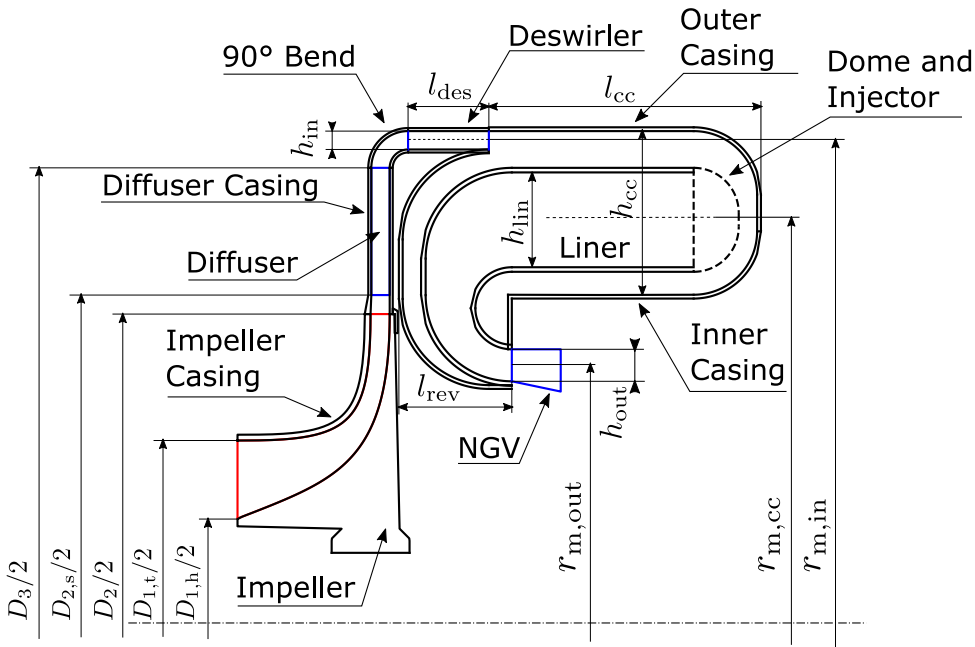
Sketch of a radial compressor connected to a reverse flow combustor indicating major components and dimensions.
